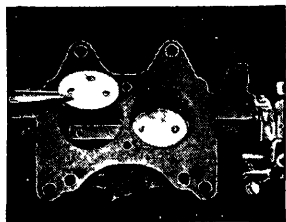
Install throttle valve. Small "c" in circle or part number should be toward idle port when viewing casting from manifold side. Center throttle valves by tapping lightly and hold in place with fingers before tightening screws
